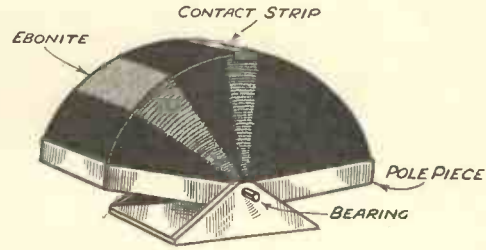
DETAIL OF ARMATURE AND BEARING.
